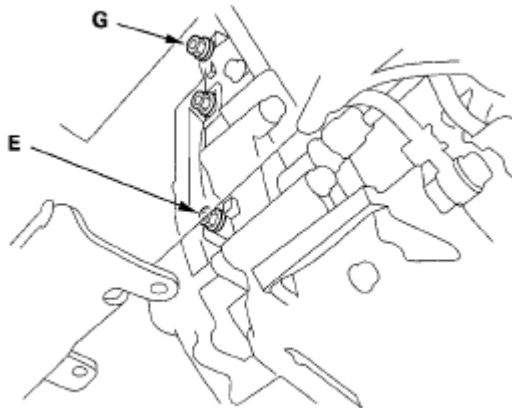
Identifying 3rd Clutch Pressure Inspection Port And 5th Clutch Pressure Inspection Port
